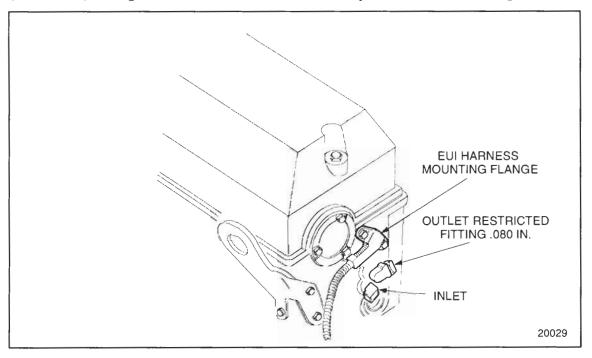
Fuel Gallery Inlet and Outlet Fittings
